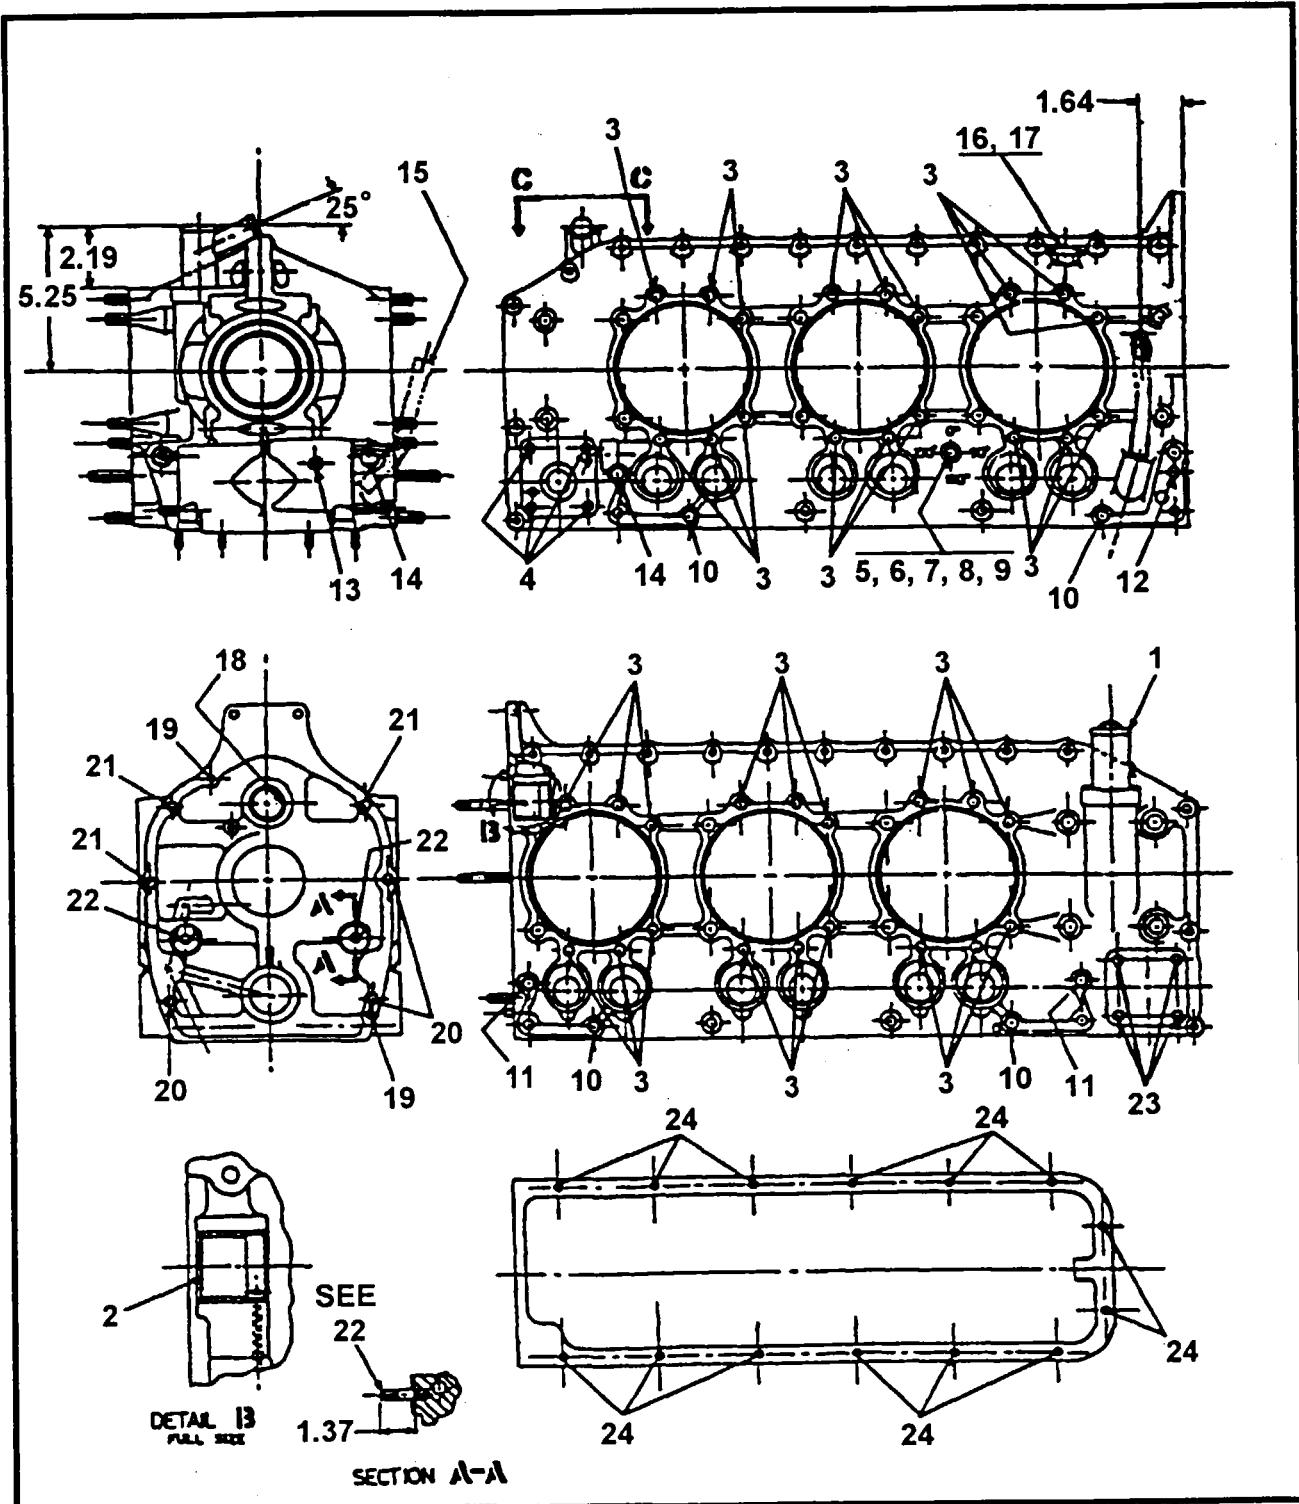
CRANKCASE STUDDING ASSEMBLY
